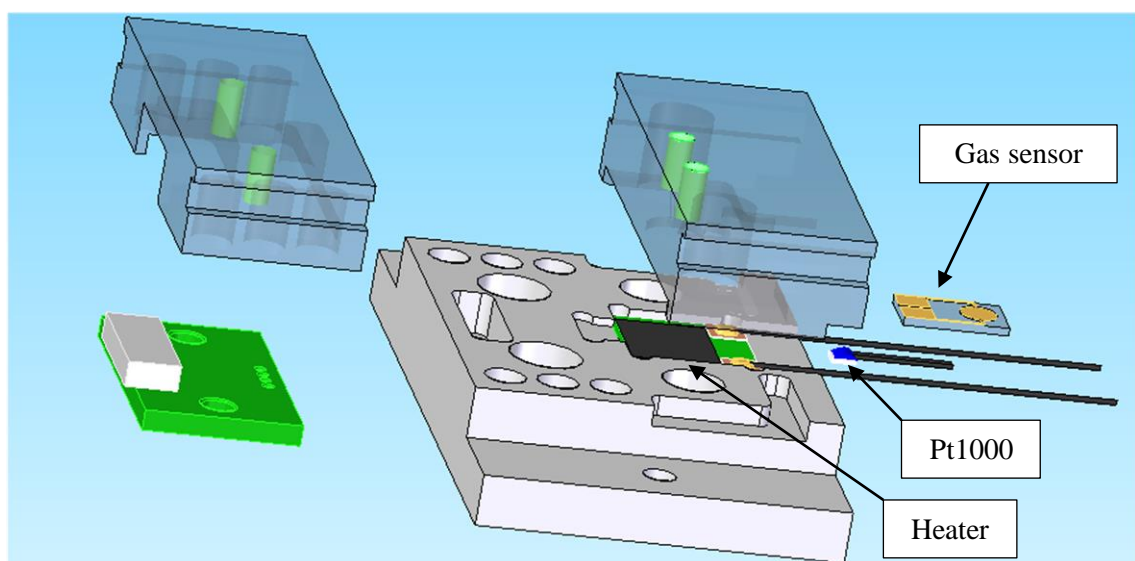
3D design of testing chamber for IDT 6×10 mm sensors
